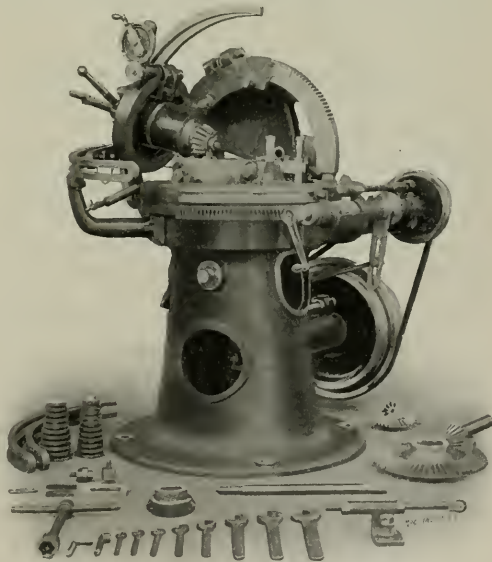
A Machine Involving the Principles Illustrated in Figs. 3 and 4.
